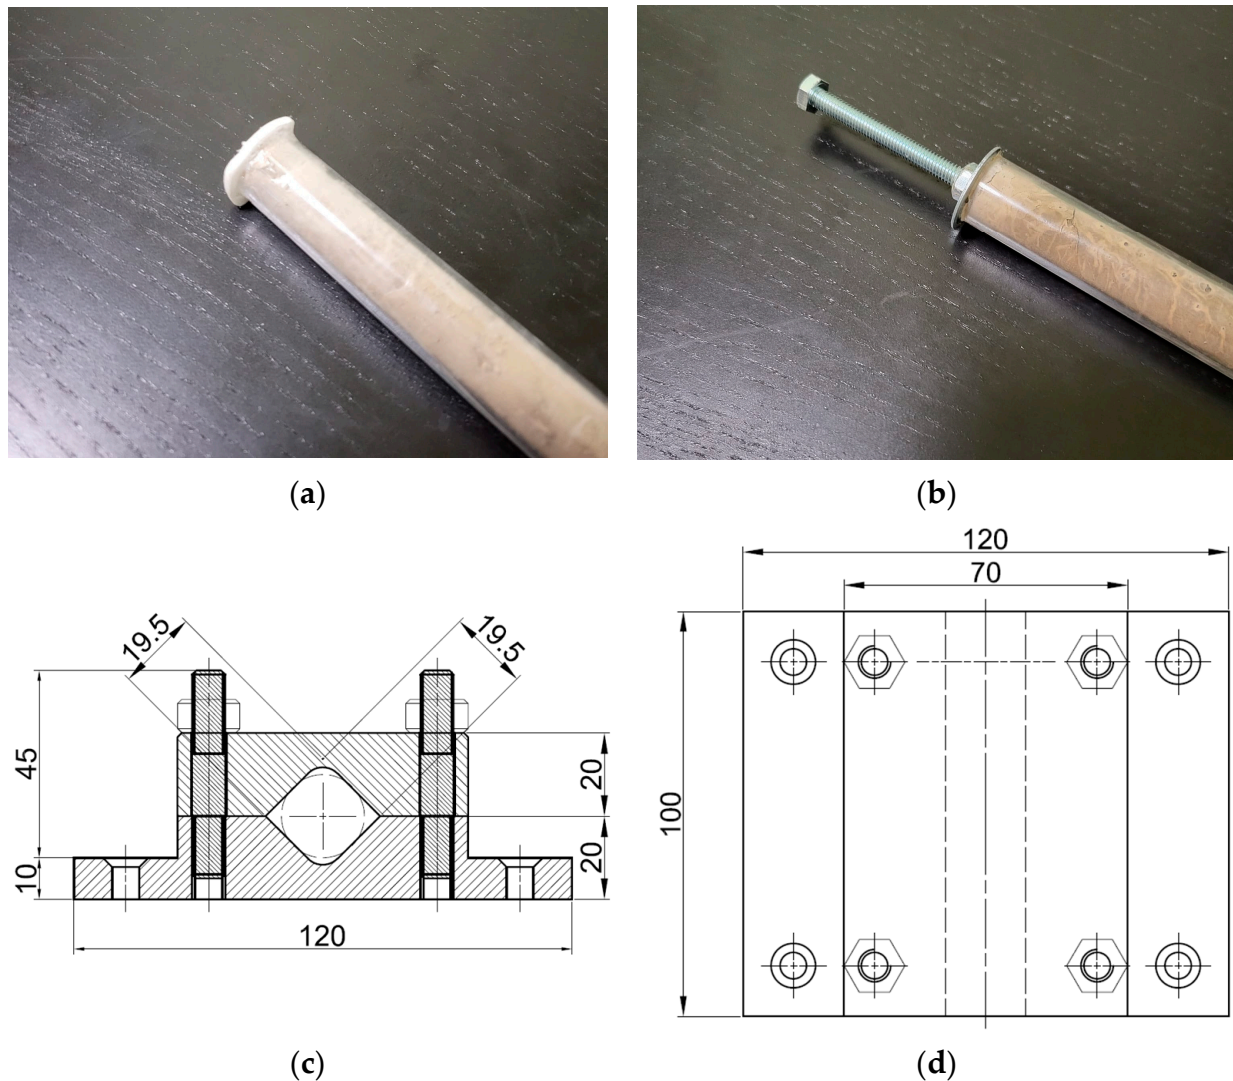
Views of specimen ends after casting (a,b), and scheme of clamping device (c,d).
